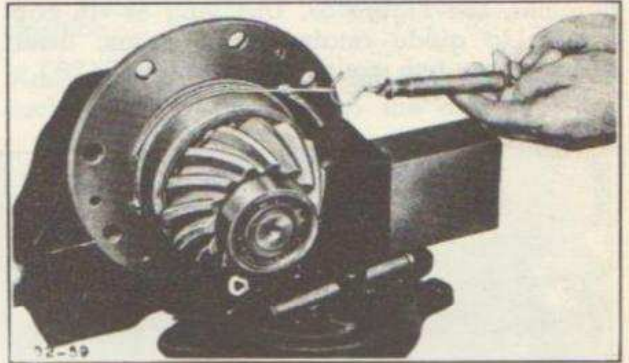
Testing 2nd Reduction Pinion Gear Bearing Adjustment
